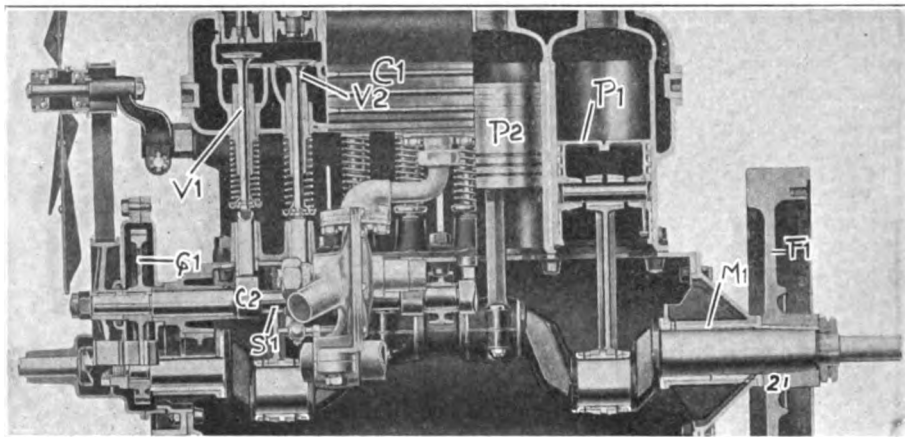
Flanders "20" motor in part section, to show details and crankshaft
